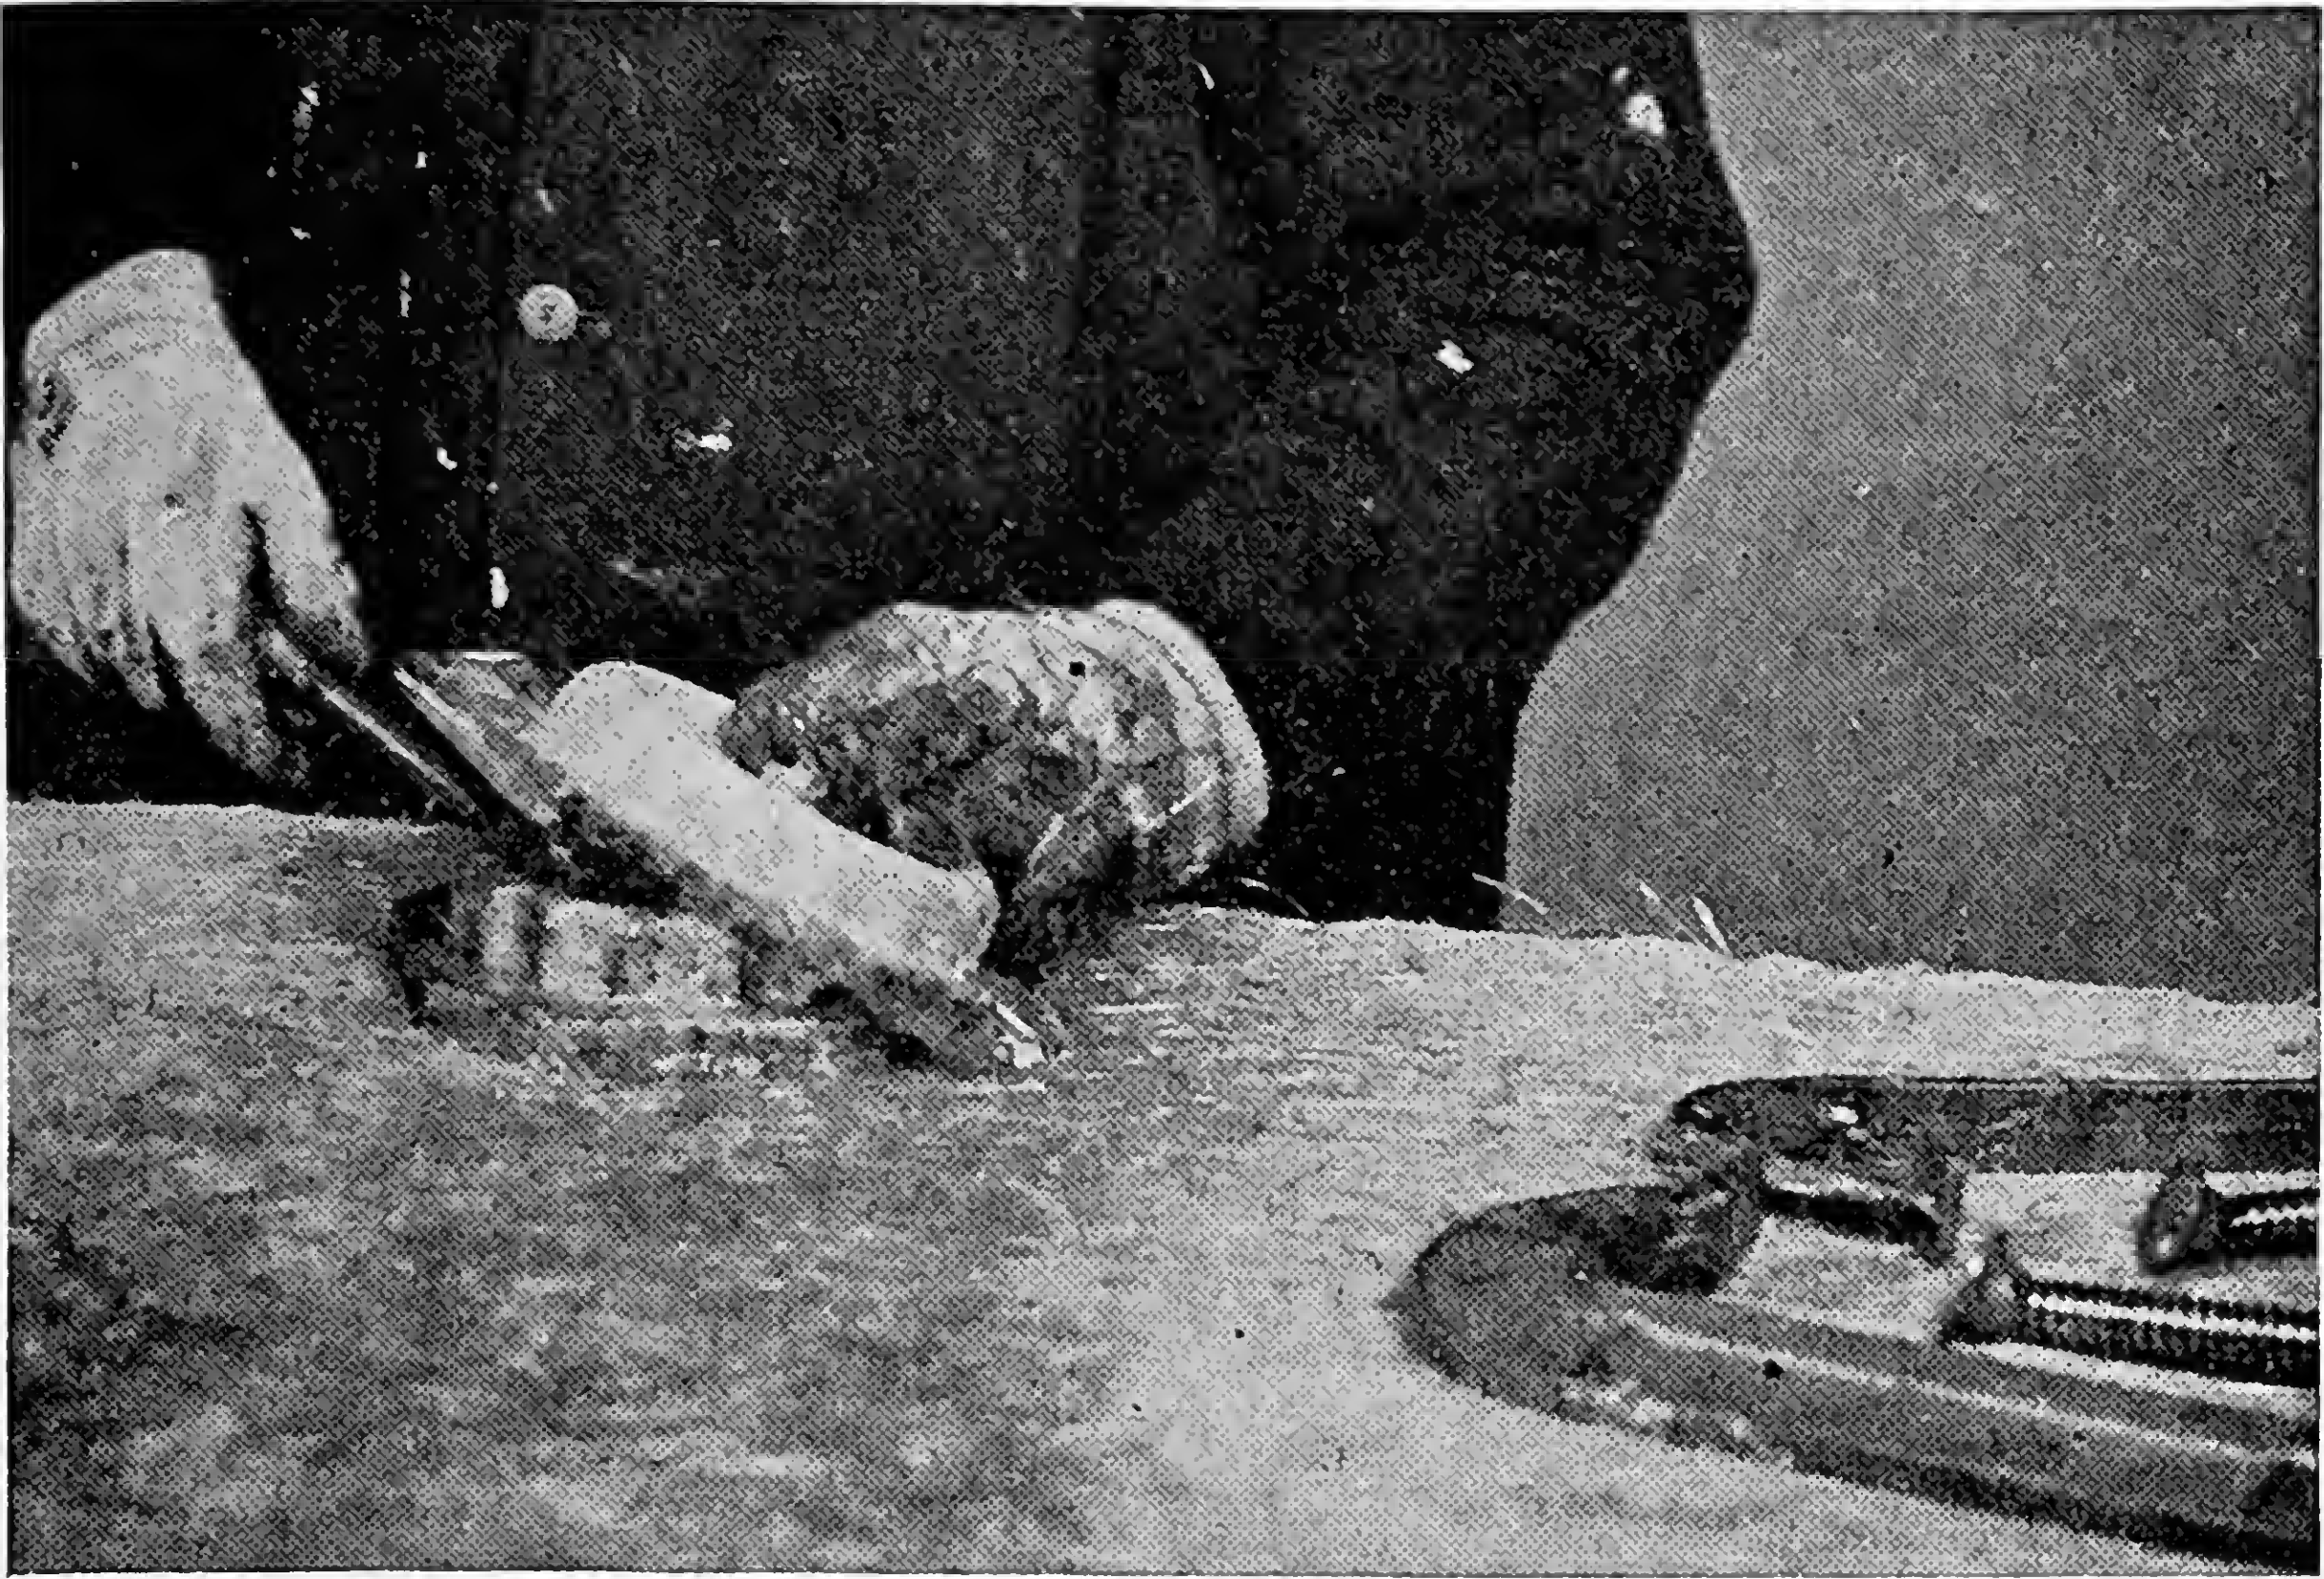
Prying molded valve handle from male die. Removal of plastic separator sheet and trimming remain to be done.
